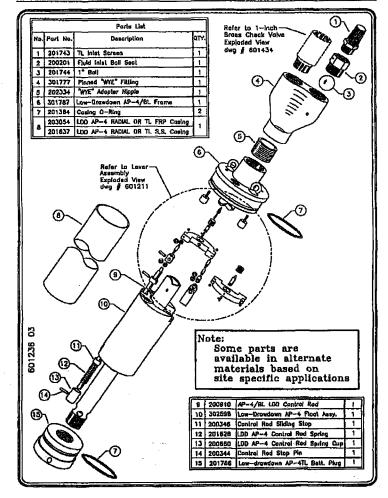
Exploded View of LDD Top-Loading AutoPump AP-4
